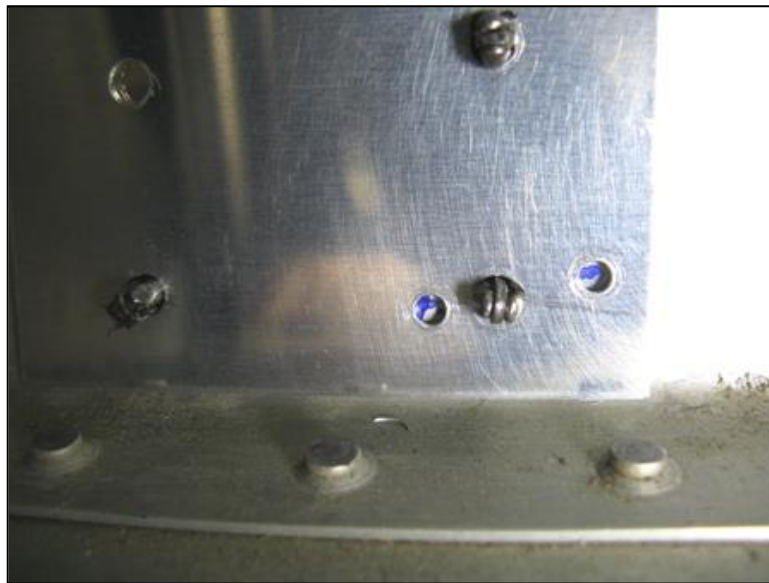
CHECK MARKS THROUGH GUIDE HOLES
